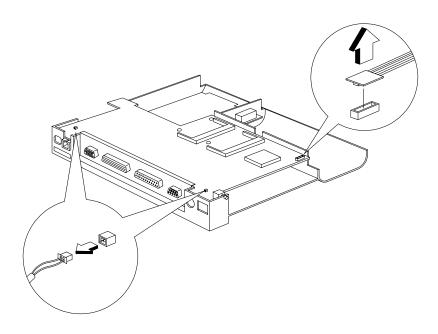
Unplugging the Speaker Connectors and Battery Pack Connector
